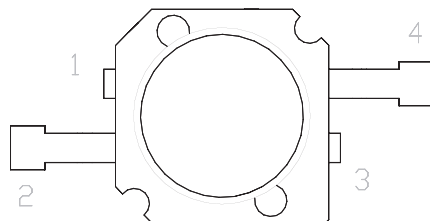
Solder Pad Layout 2-Lead Gullwing.
